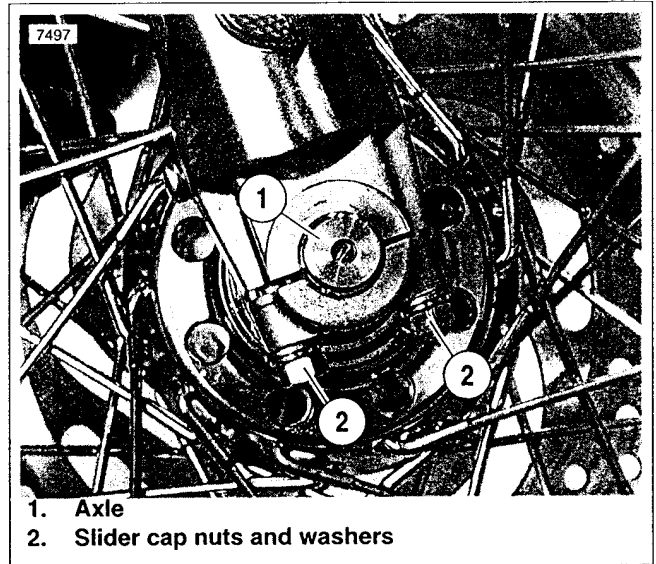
Front Wheel Mounting: FXDWG (Right Side)
